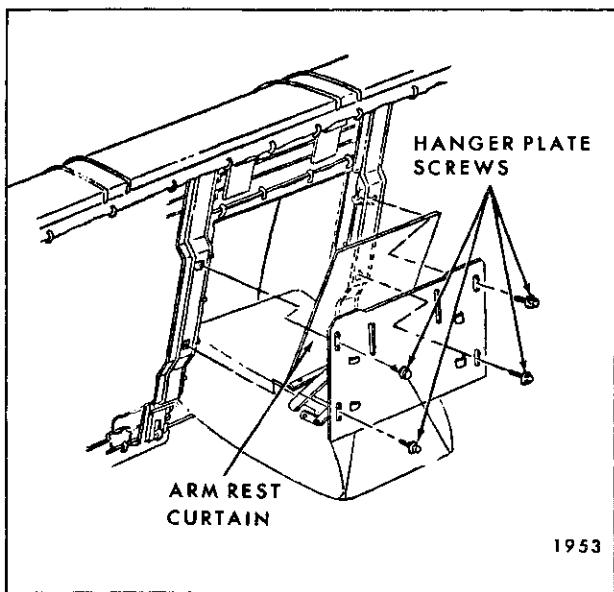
Rear Seat Back Arm Rest and Hanger Plate
